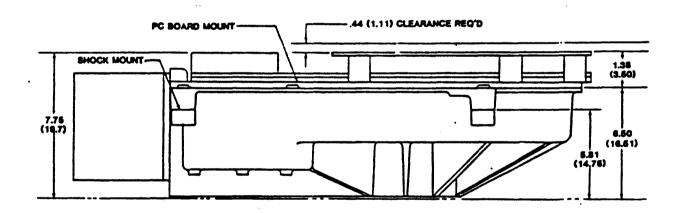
A. AMS Basic Drive Dimensions (Side View)
